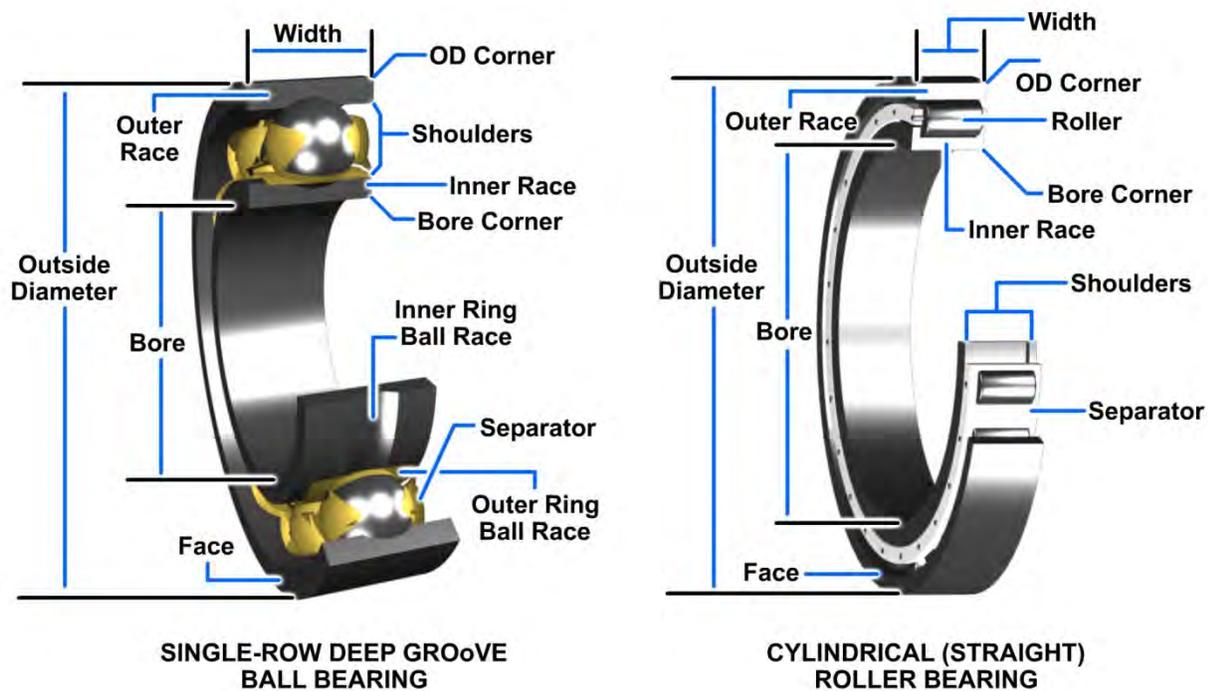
Cutaway view of a ball bearing and roller bearing
